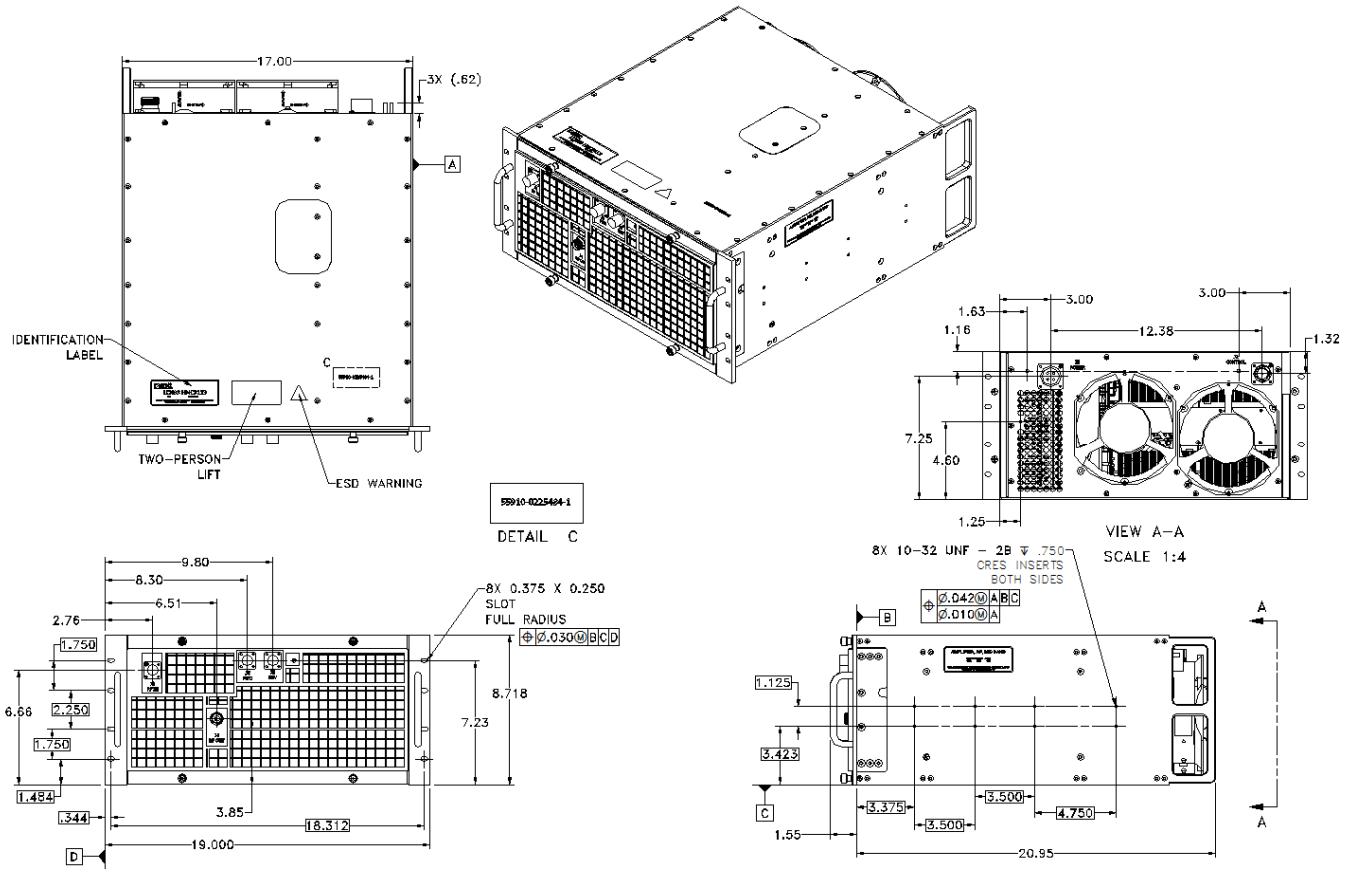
5U Rack-Mount Chassis with Connector Interface [MODULE]
